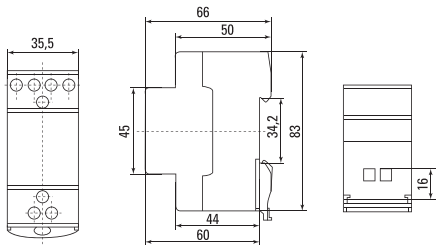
Overall dimensions of Bell transformer VT-230/15VA
